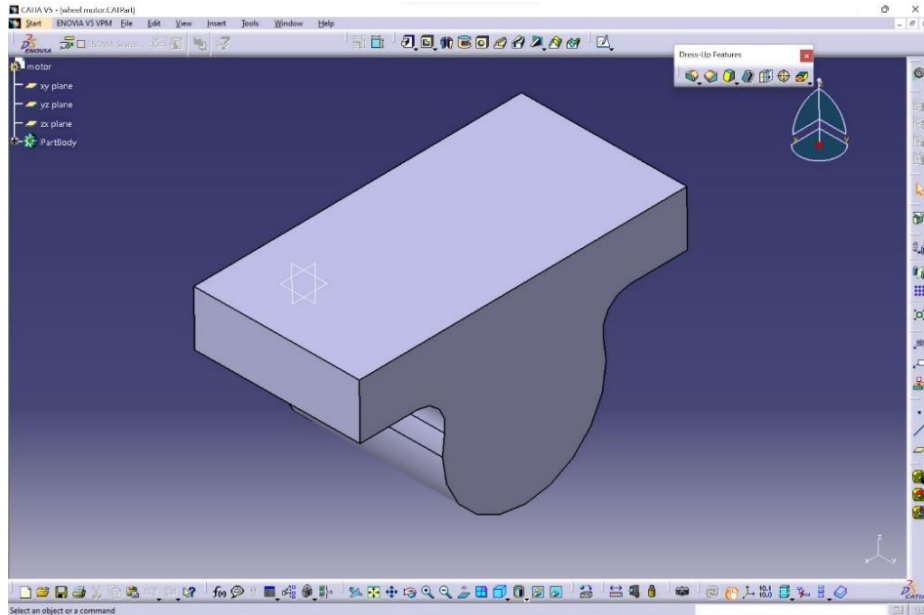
3D Model of Wheel motor in CATIA
